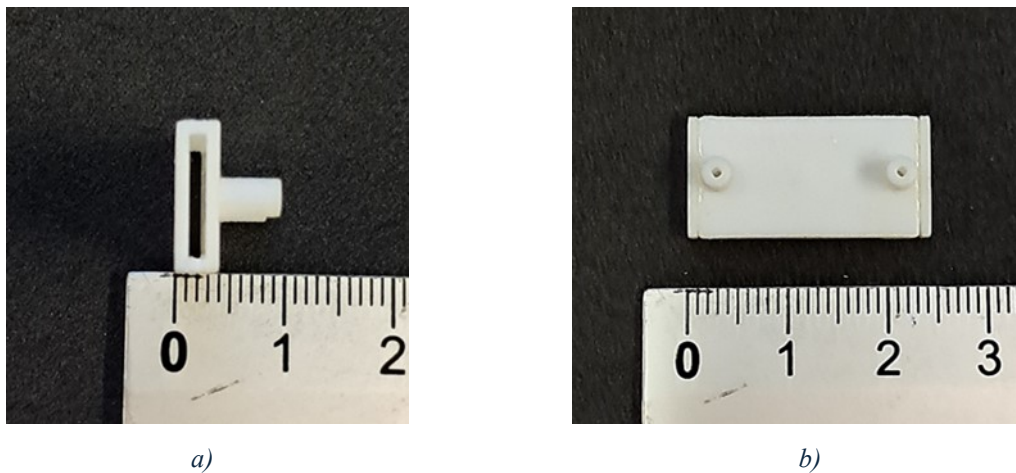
Container: (a) hollow section; (b) the final structure with the glued caps.
